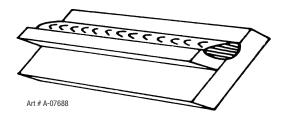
Flat Position, Gravity Fillet Weld
